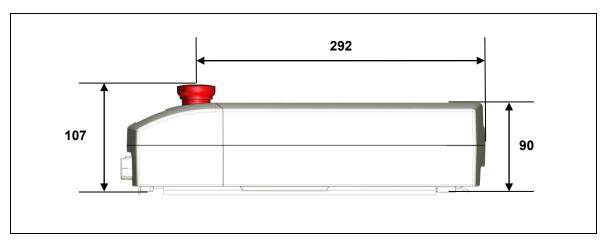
Dimensions of the ACCUCONTROL, side view (in mm)
